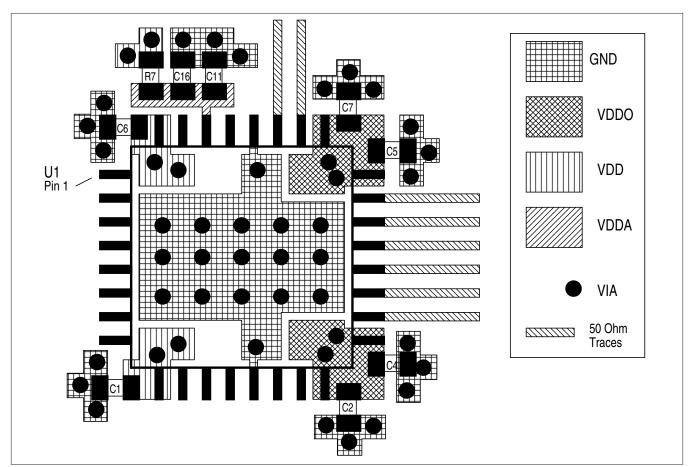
B. PCB BOARD LAYOUT FOR ICS8725-01
